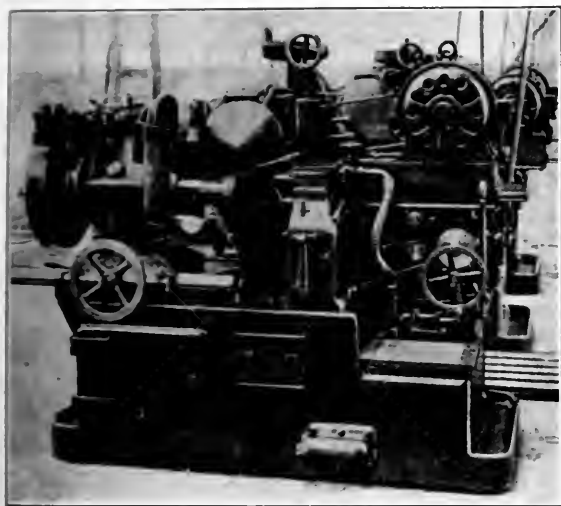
GENERAL VIEW OF MACHINE FOR FINISH GRINDING SPUR GEAR TEETH
